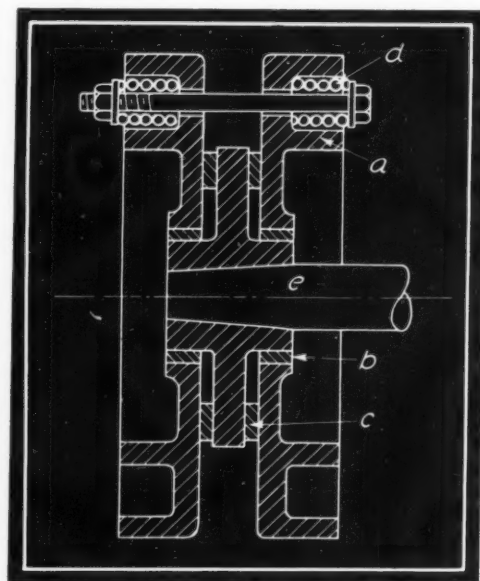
Cross section of Lanchester damper showing at a, flywheel; b, bronze bearings; c, friction disks; d, loaded springs
